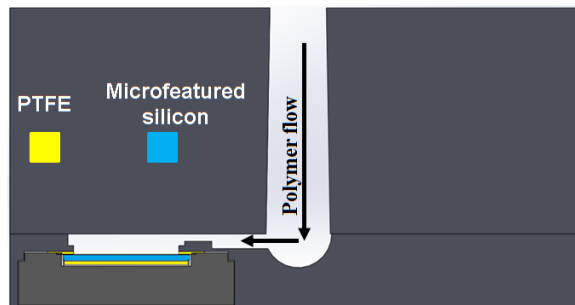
Two dimensional representation of polymer flow using clamp assembly.
